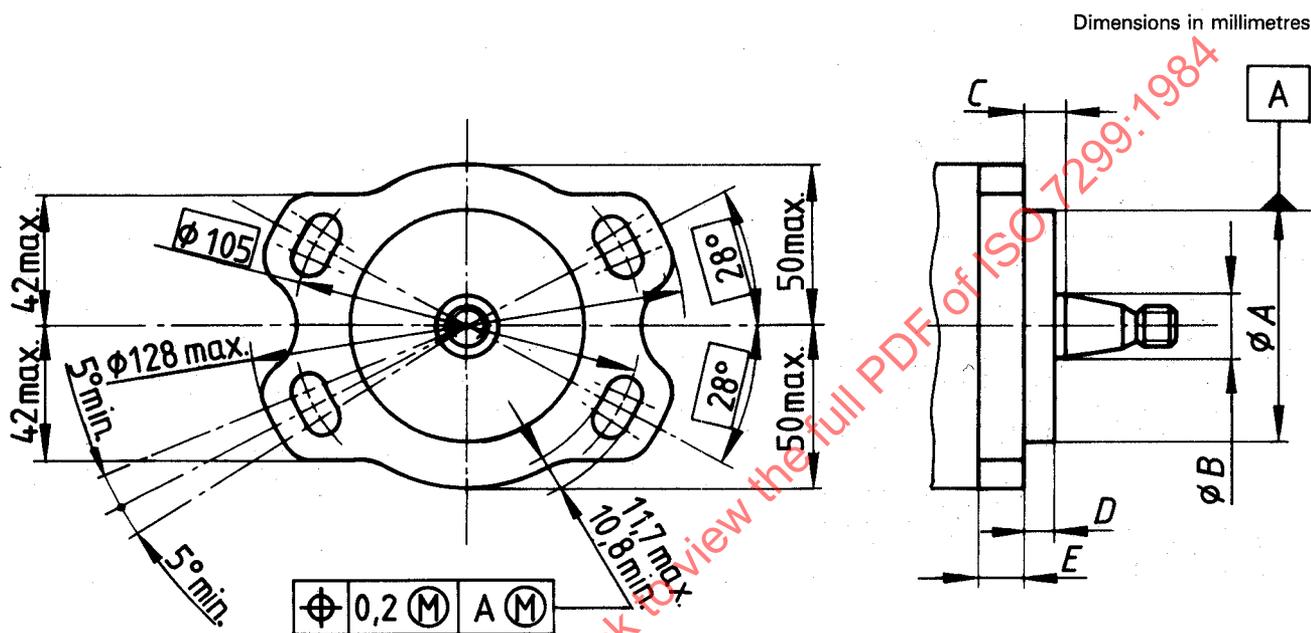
Rotary and distributor fuel injection pumps — Type 3 end-mounting flange
